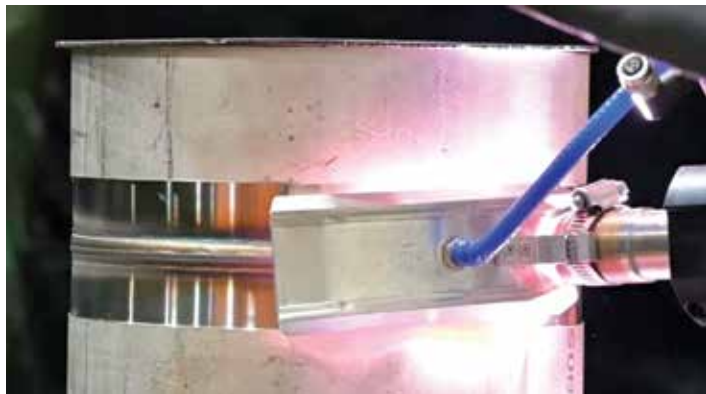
TANICS™ during welding showing trailing shield for inert gas supply.
